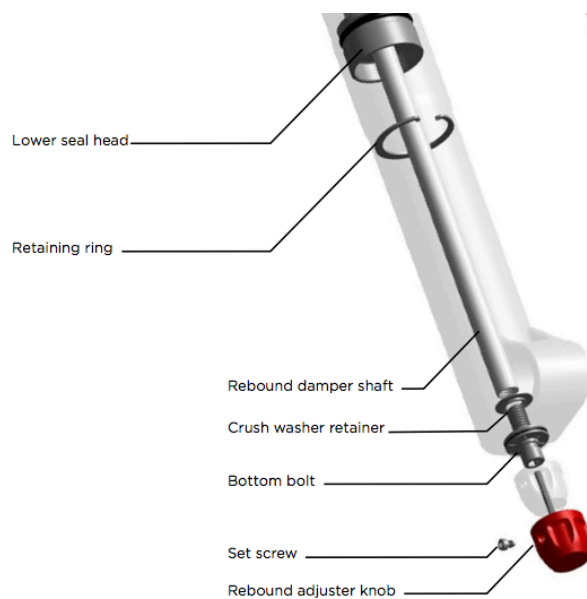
Rockshox Boxxer right leg - exploded view (Rockshox, 2017)
